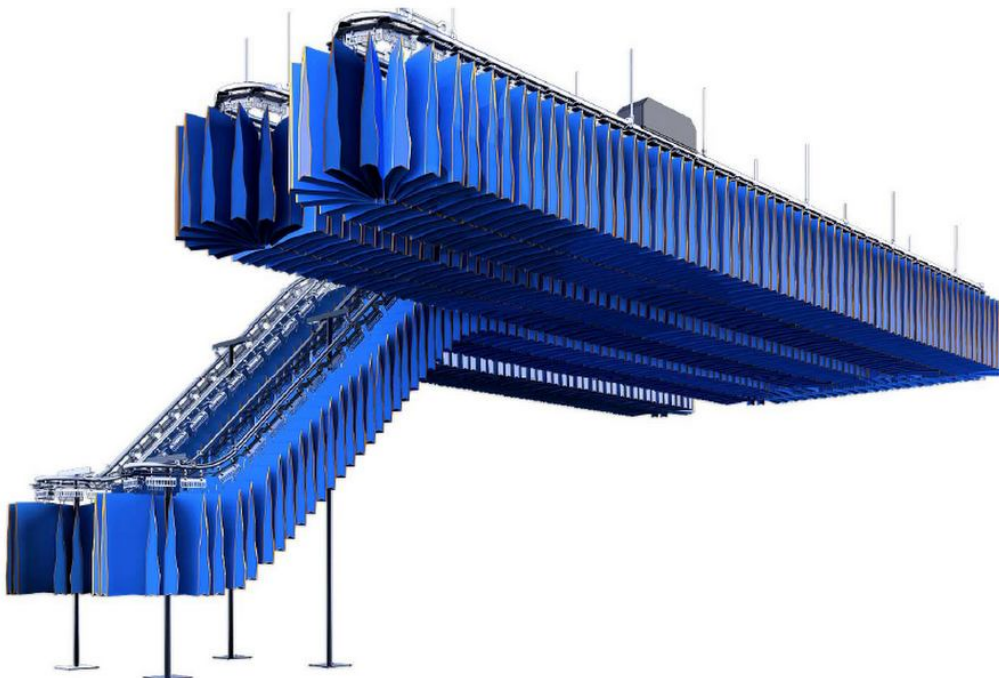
Uniform conveyor [www.rkconveyors.com]
